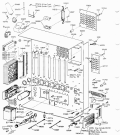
MECHANICAL ASSEMBLY EXPLODED VIEW
